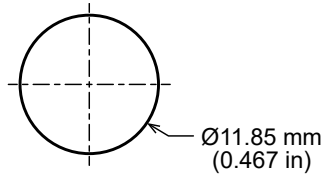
ANT-433-SPS1 Mounting Hole Dimensions
